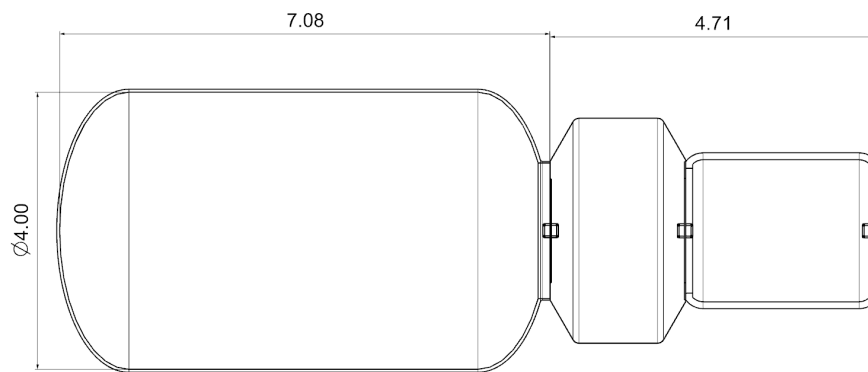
Micro-gravity 40 m^3 Dimensioned External Drawing, units in meters
